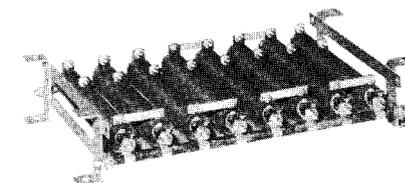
IC9133 assembled, wired resistor boxes are furnished suitable for stacking or for installation in mounting racks.
